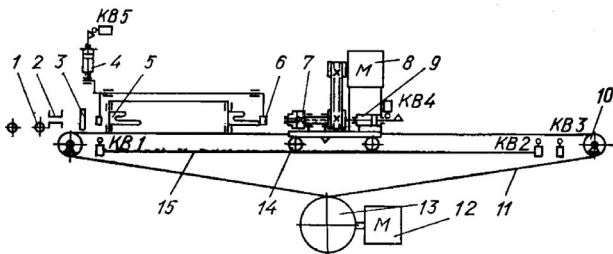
Basic schematic of the installment for quenching boring pipes and locking connections: 1, roller conveyor; 2, leading cartridge; 3, indicator; 4, pneumocylinder; 5, sliding plugs; 6, sliding pickups; 7, tightening cartridge; 8, electric motor; 9, pneumocylinder; 10, deflative rollers; 11, steel rope; 12, electric motor; 13, drum; 14, pneumocylinder; 15, guides; KB1–KB5, final switches.
